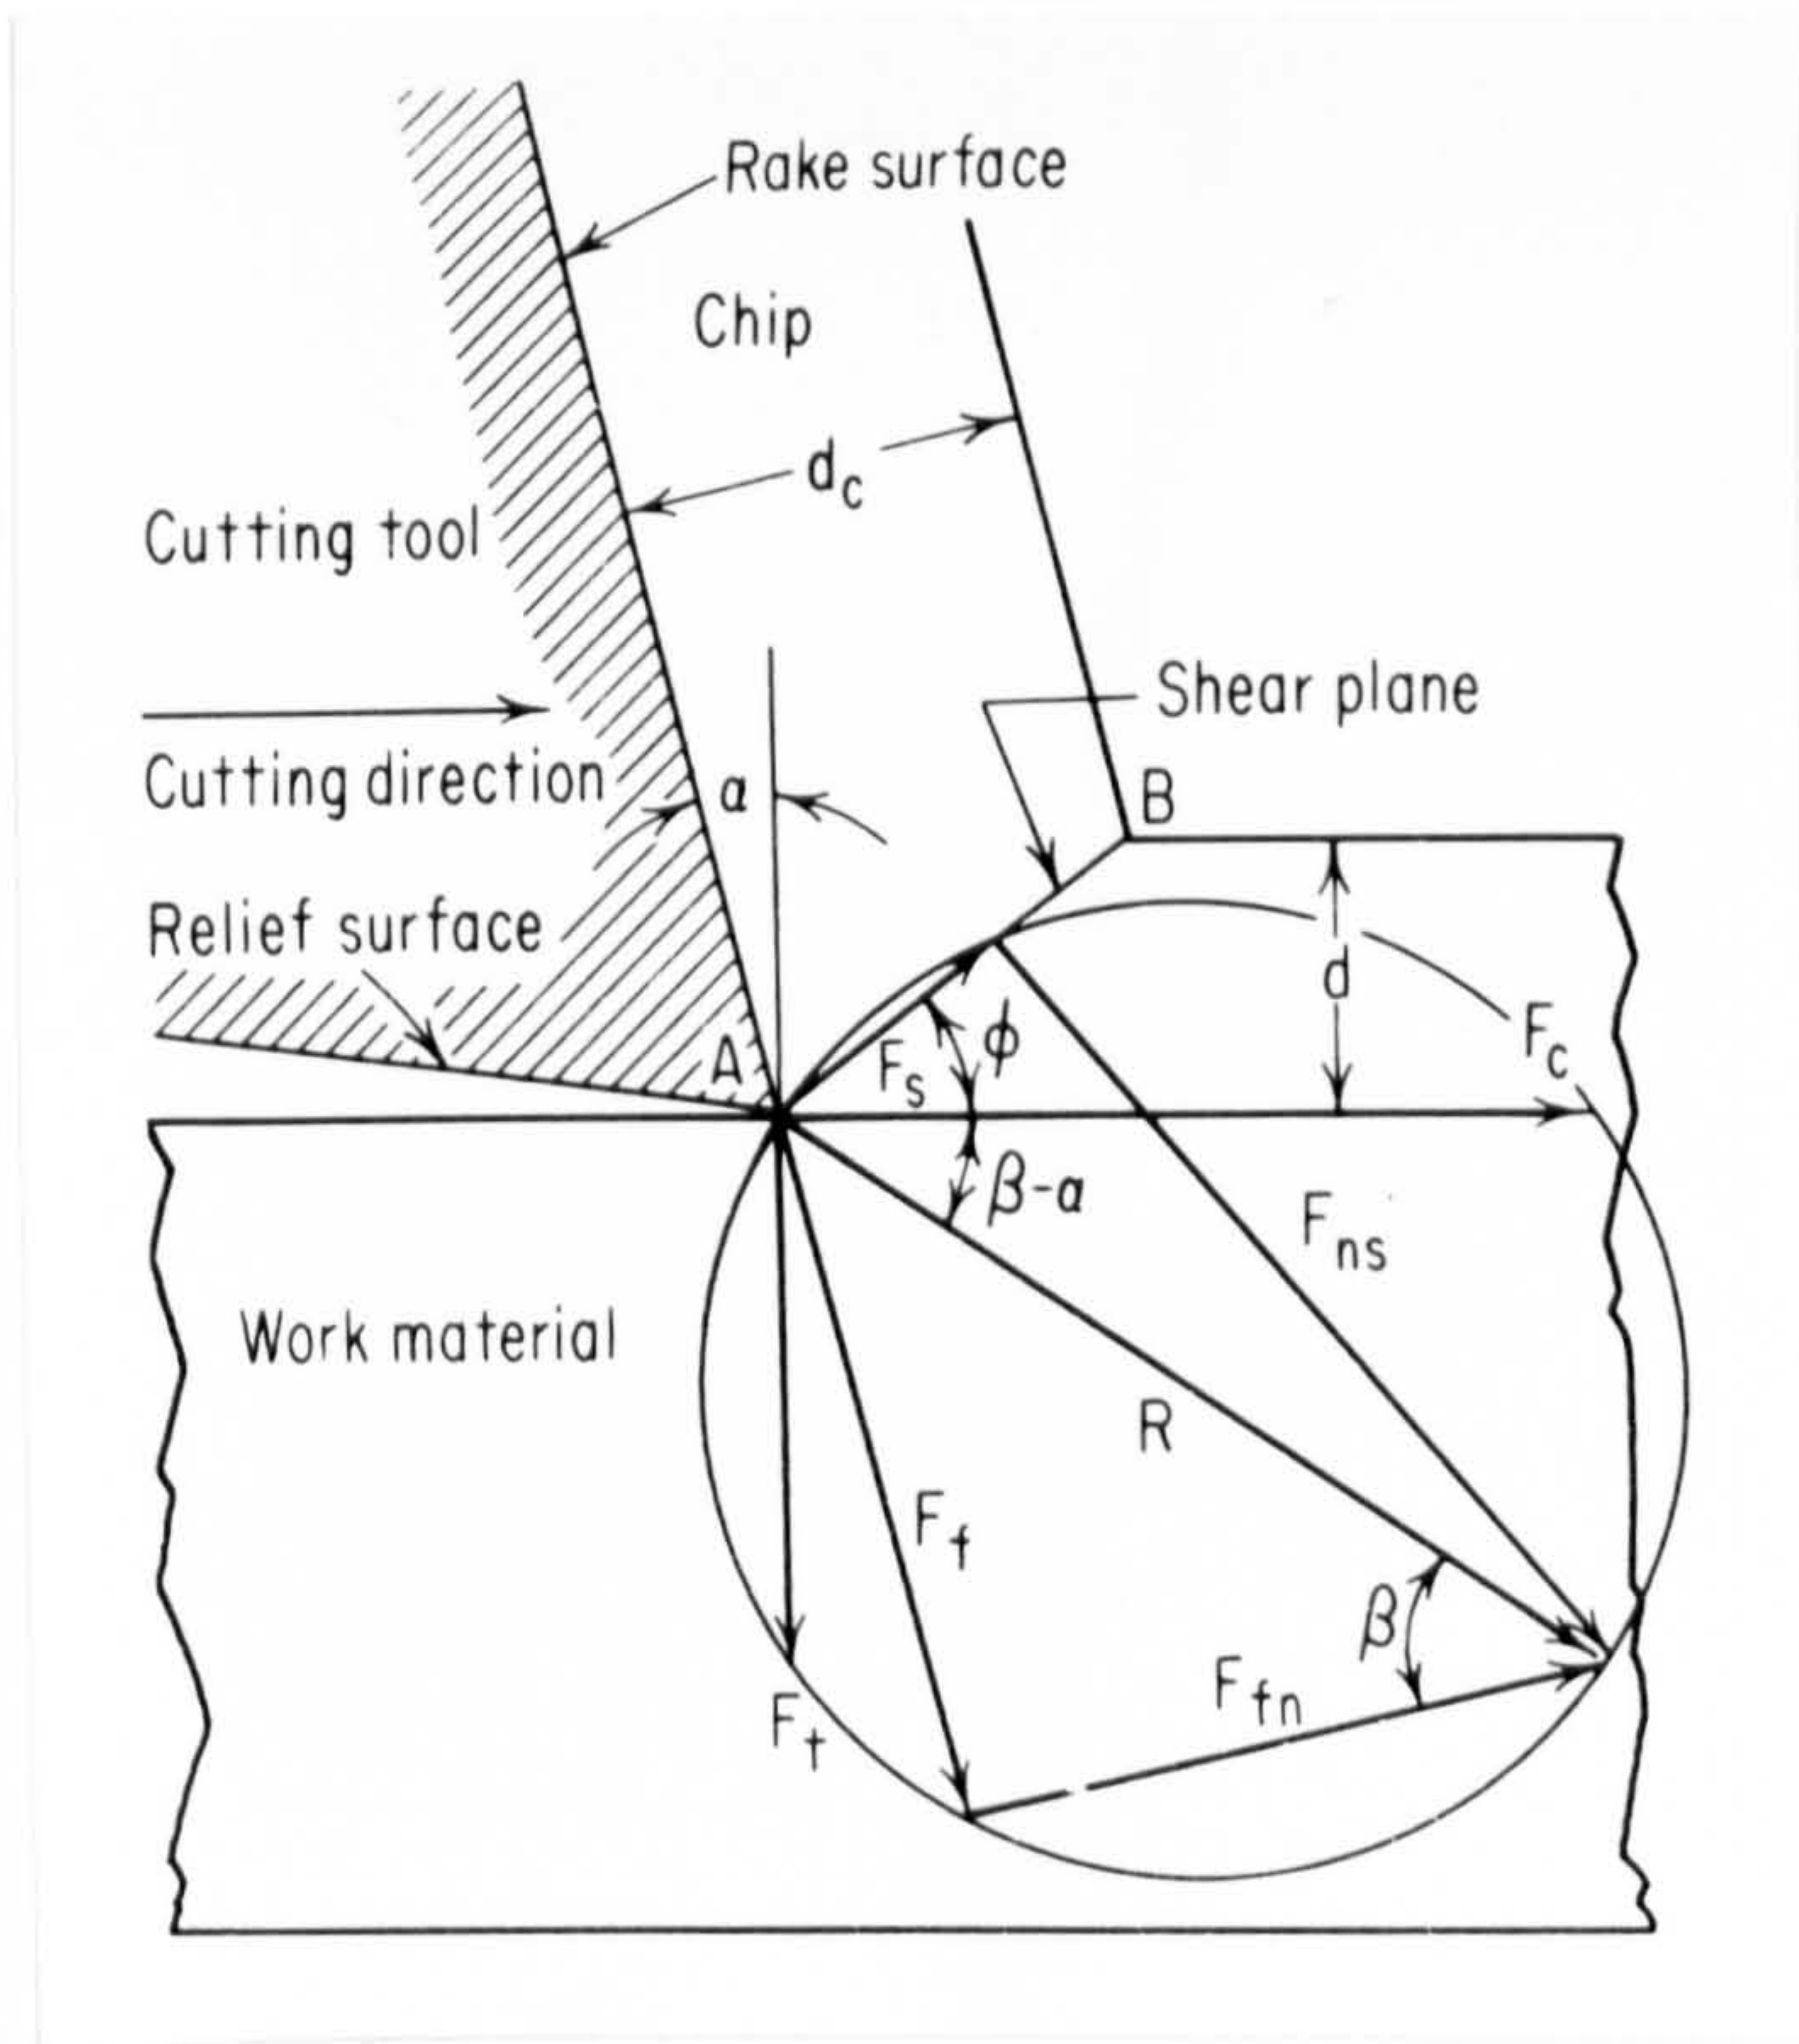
Equilibrium of cutting forces during cutting when a shear plane is formed (118)
